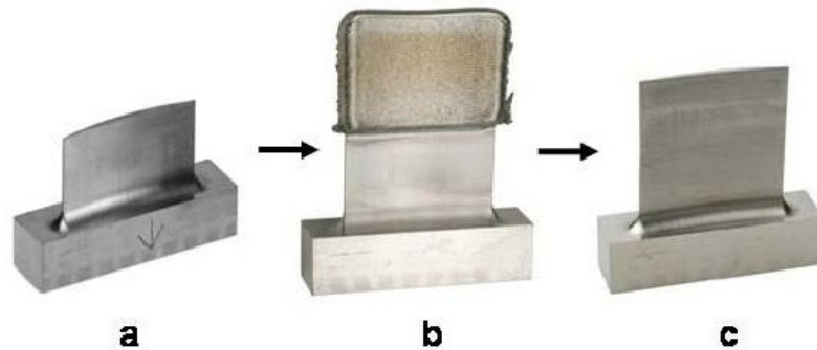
Ti-6242 turbine blade repaired using DED and post-process machining [122].
